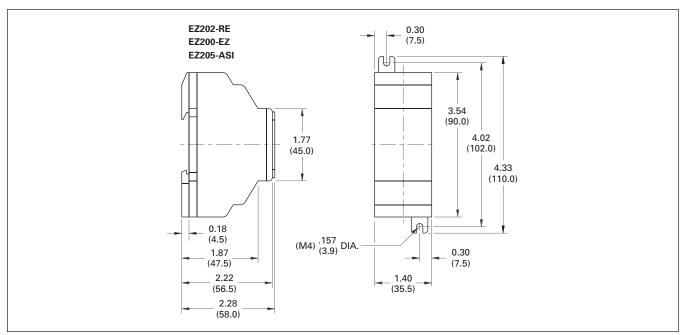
EZ202-RE/EZ200-EZ/EZ205-ASI Series Dimensions in Inches (mm), Drawing Number MD05013012E
